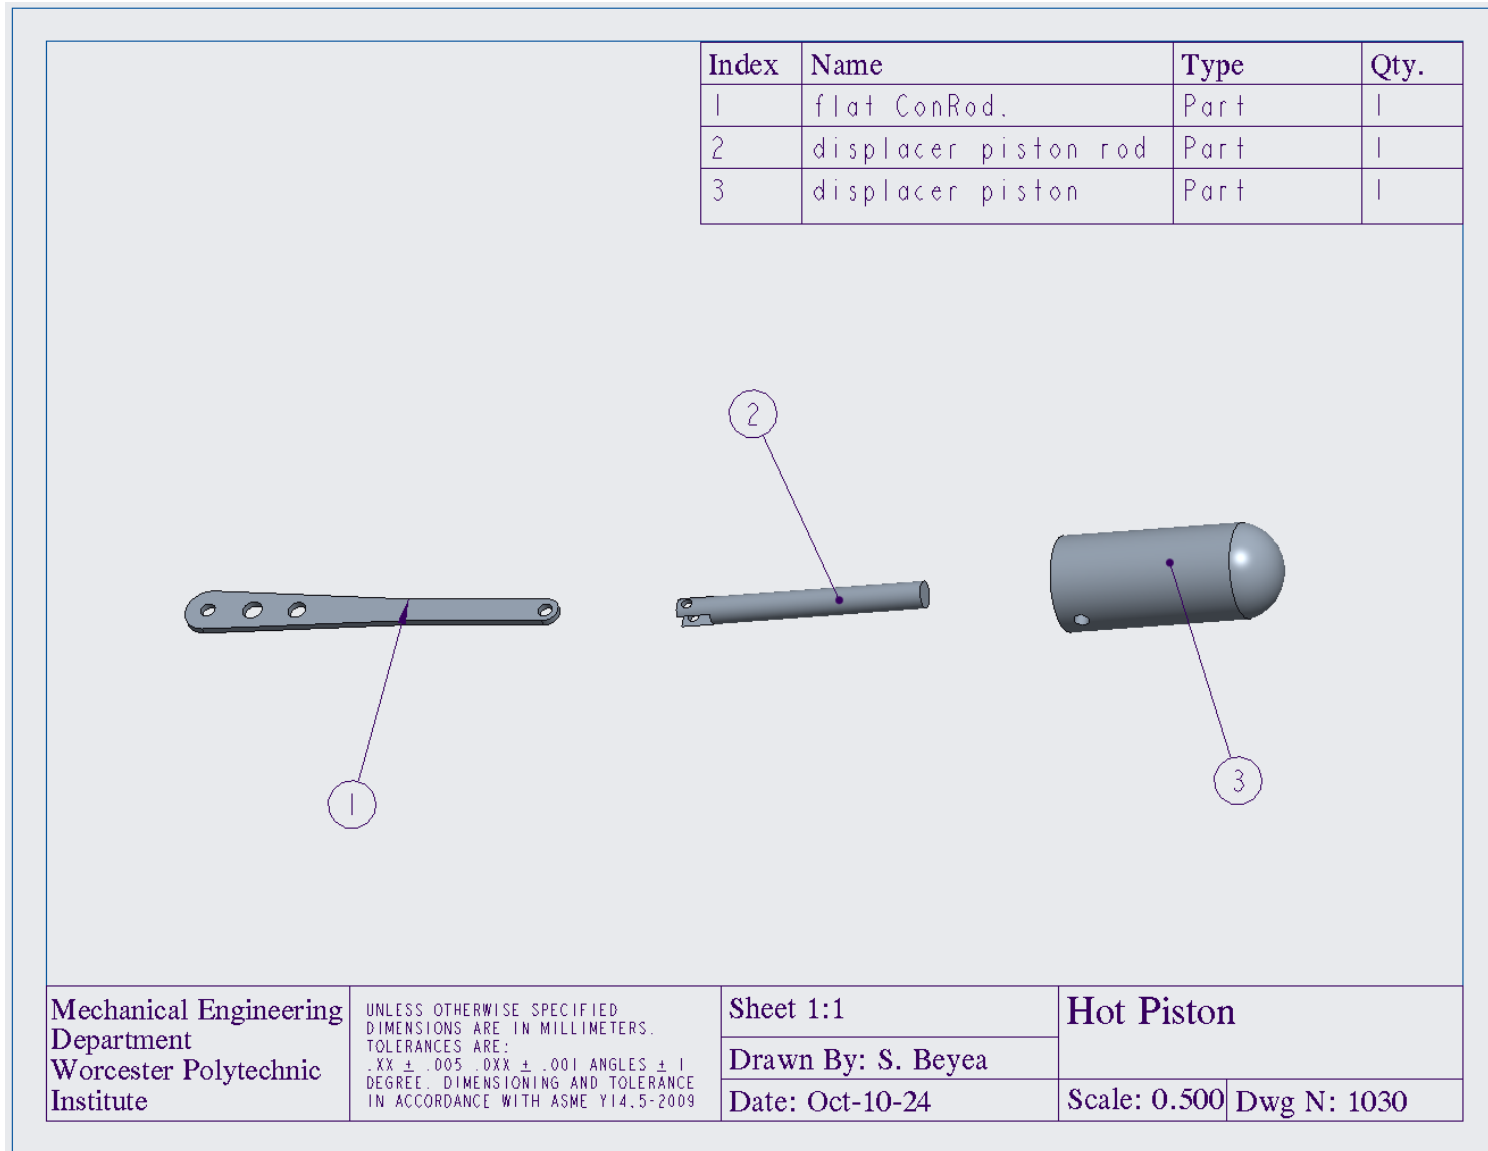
exploded view of the hot piston assembly (with balloons and BOM).
